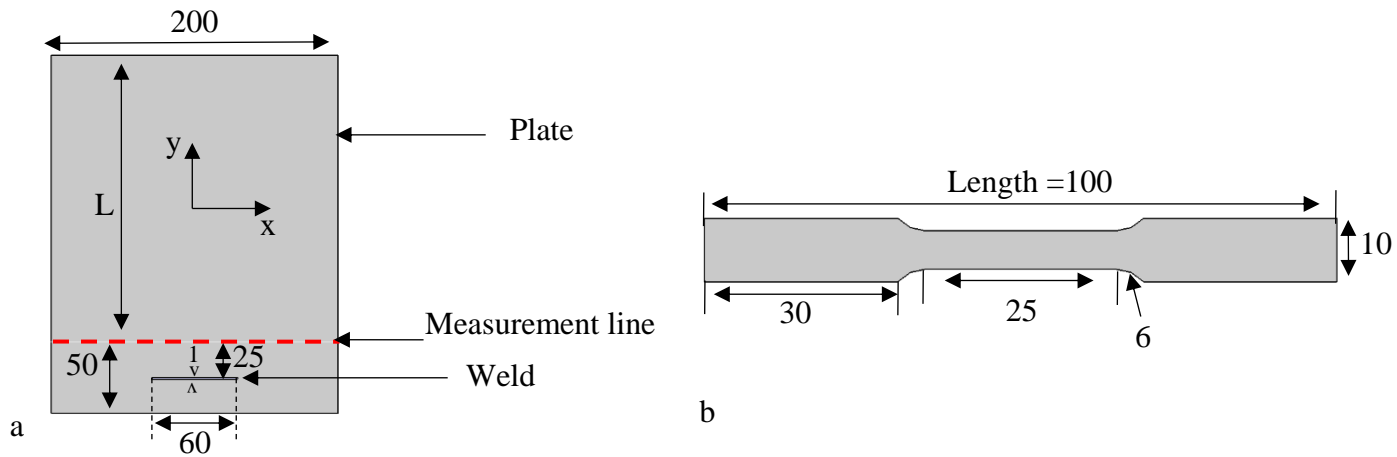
Test specimen geometry (a) and tensile specimen design (b). Dimensions are in mm.
